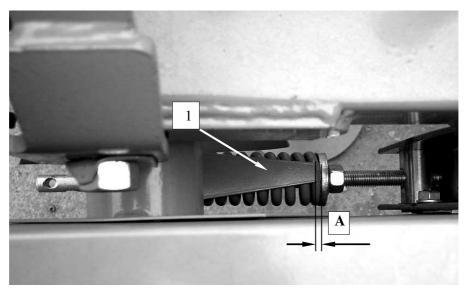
Spring V-belts tensioner, 1 - checking plate. Check dimension "A" should be 0 - 0.12"
